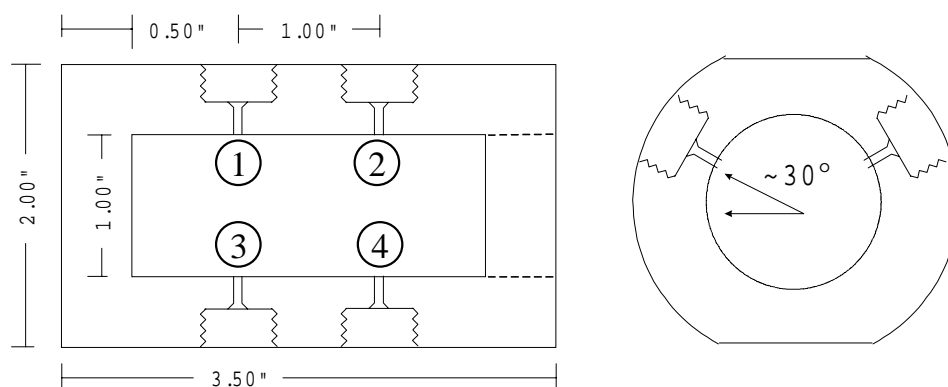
Machinist's drawing of the batch reactor. (Dimensions given in inches).
